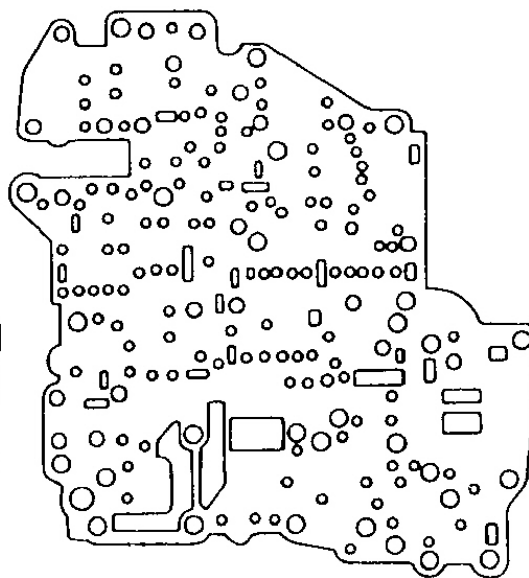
Locating A-541E Lower Valve Body (Bottom) Check Balls
